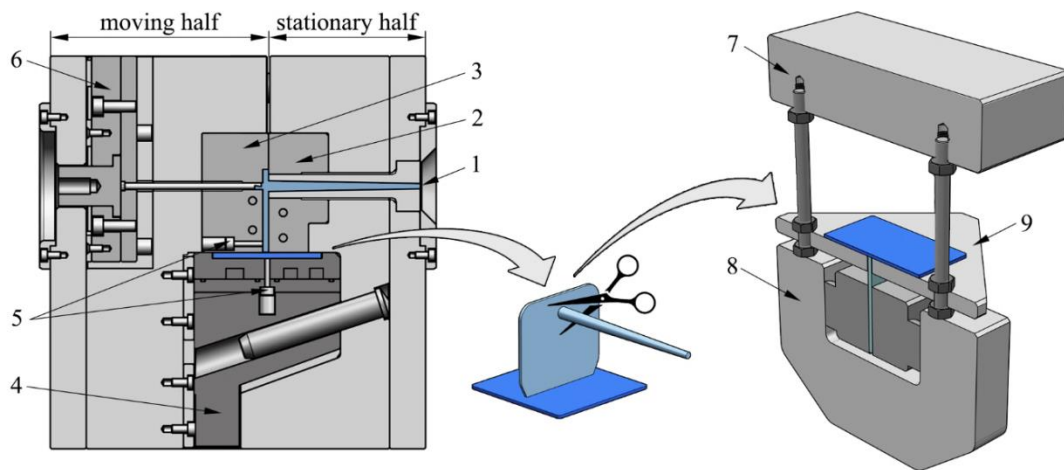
Overmolding mold and tensile test setup: 1 – injection point, 2 – cavity insert, 3 – core insert, 4 – slider, 5 – pressure and IR temperature sensors, 6 – ejection system, 7 – tensile machine, 8 – vise, 9 – gripper plate
